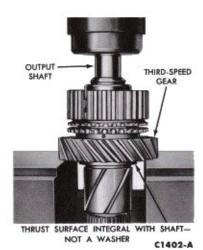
Removing Third Gear and Third and Fourth Synchronizer Hub
